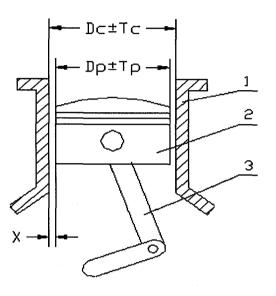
Assembly Drawing of Example 1 (from Zhang and Wang (1993)) (Note: 1—Cylinder, 2—Piston, 3—Crank)
